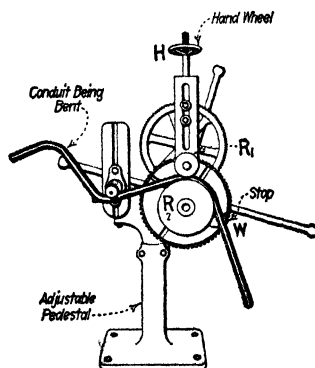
Forming a double-right-angle bend on the roll bender. (The radius for all of these bends is 5 inches.)
